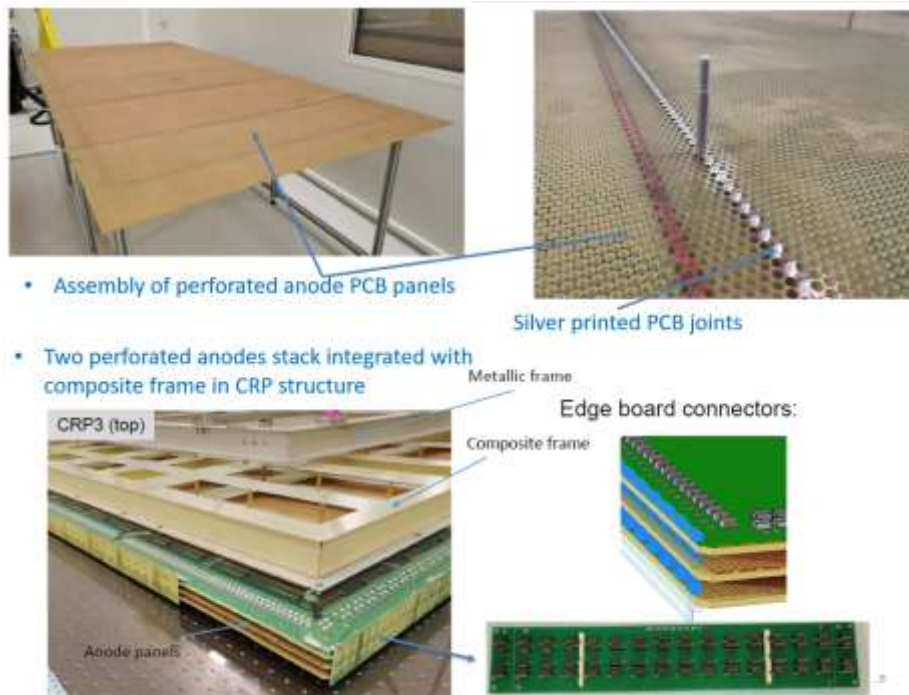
Structural details of the perforated PCB panels and a CRP including the composite frame support structure and a stack of two layers of perforated PCBs from pictures taken during the CRP construction
